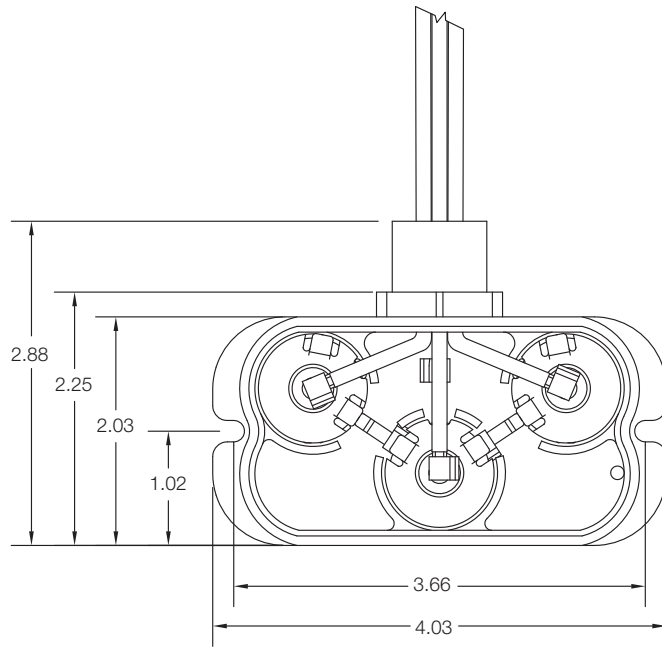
MOV Storm Trapper surge arrester top view cutaway with dimensions.
